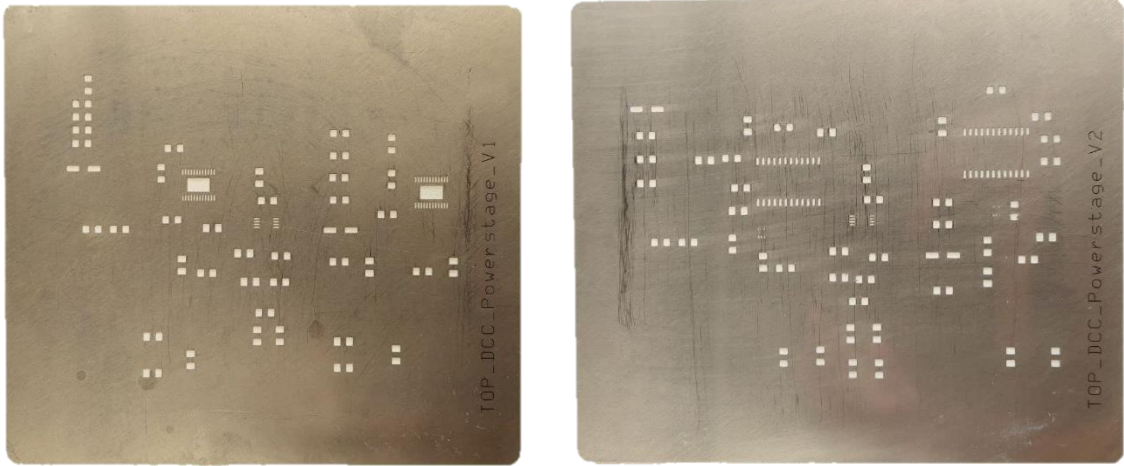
Solder Masks for each PCB (DRV8873H left and L6206D right)
